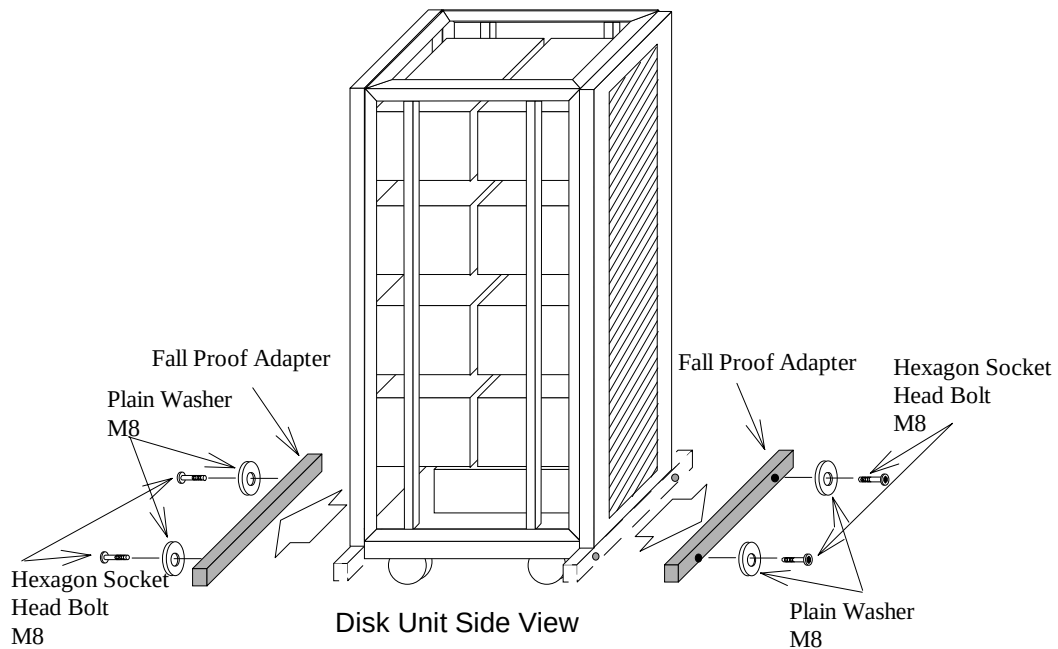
Removal of Fall Proof Adapter
